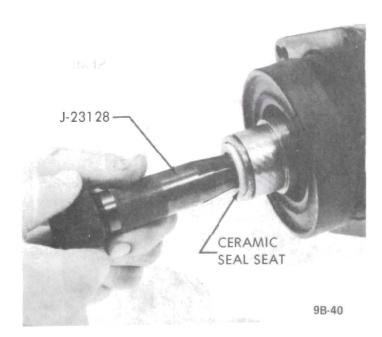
B-46 Removing or Installing Ceramic Shaft Seal Seat
